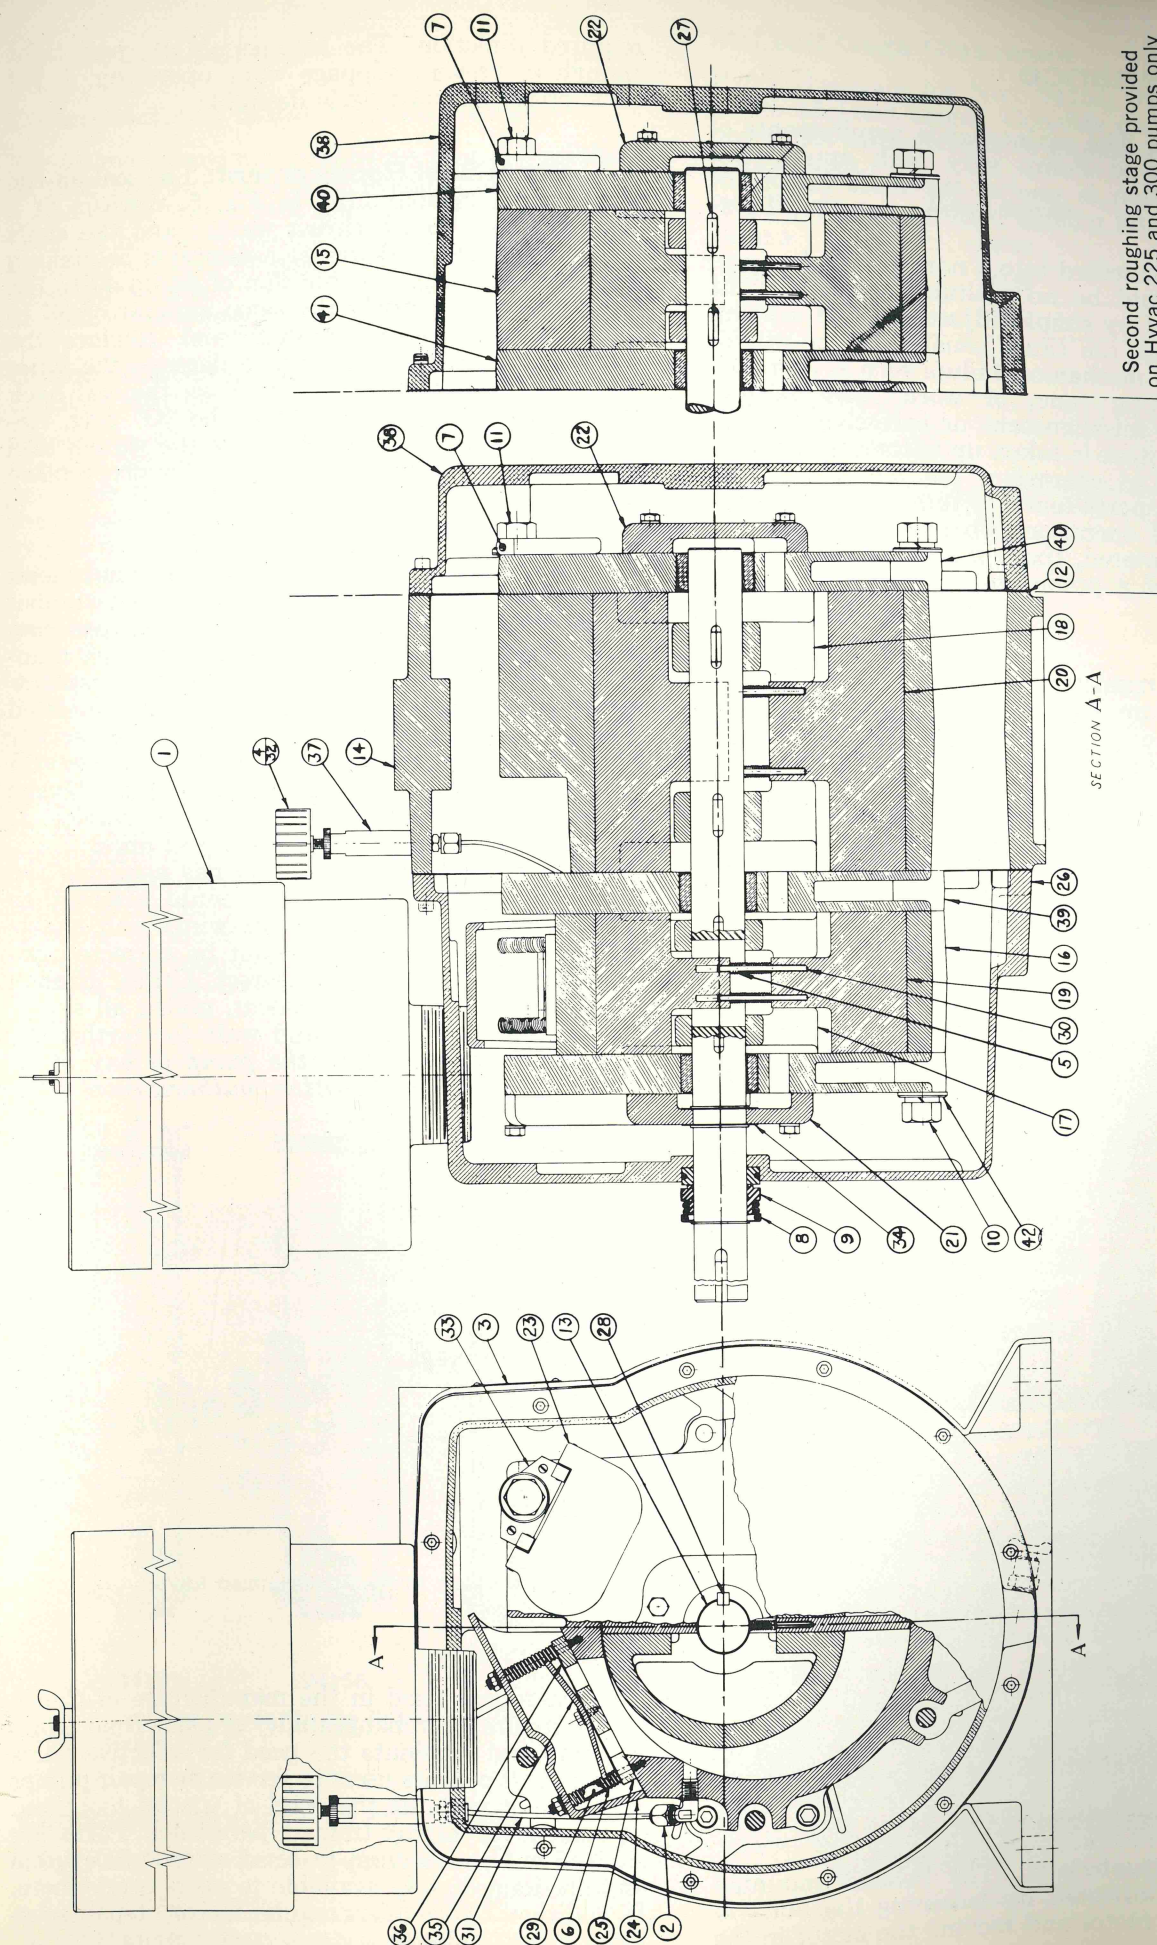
Sectional view of the Hyvac 150, 225, and 300 pumps
